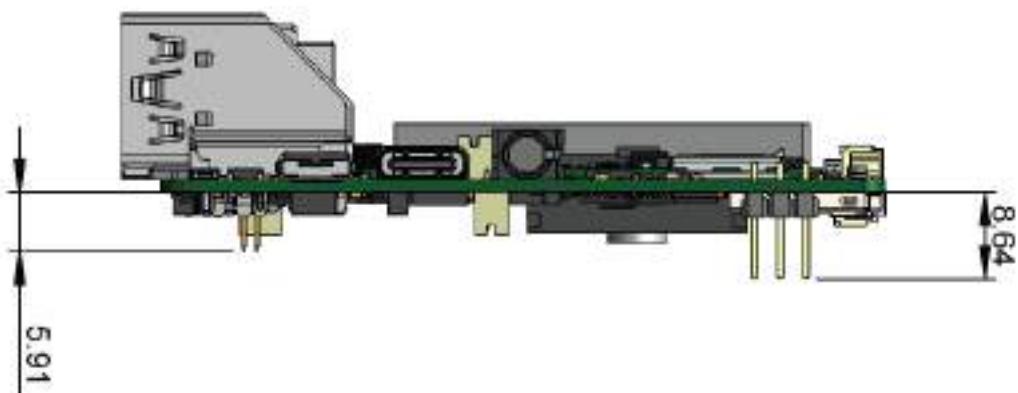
Mechanical Dimensions of i.MX 93 or i.MX 91 Pico ITX SBC Side View-2
